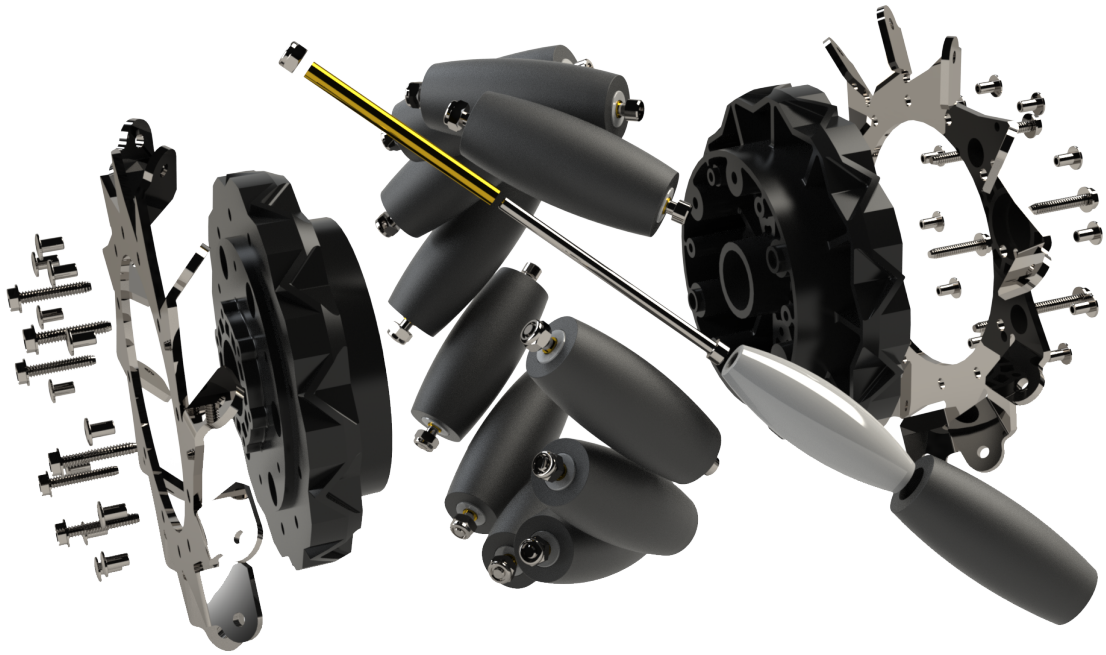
Andymark 8" Mecanum wheel exploded view
